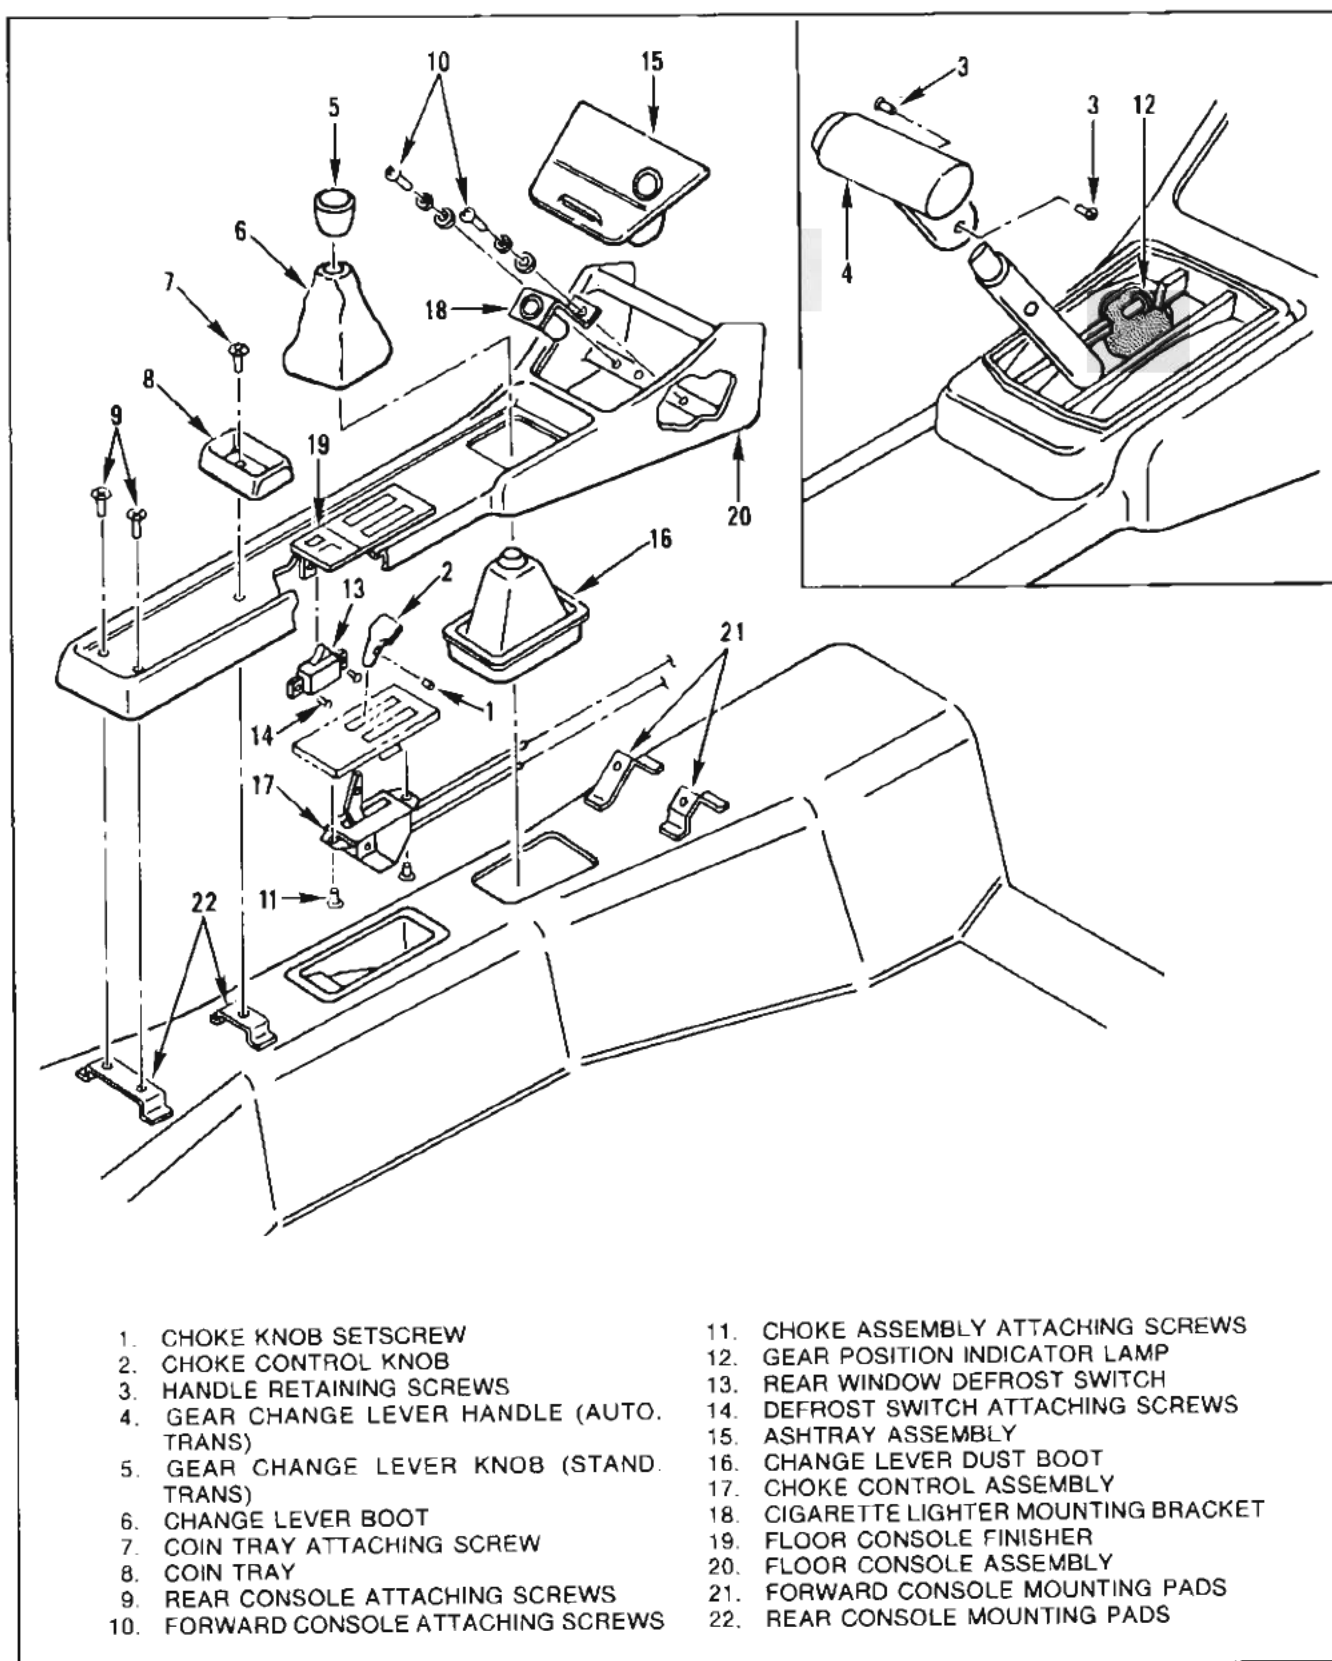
Floor Console and Attaching Hardware (Exploded View)
